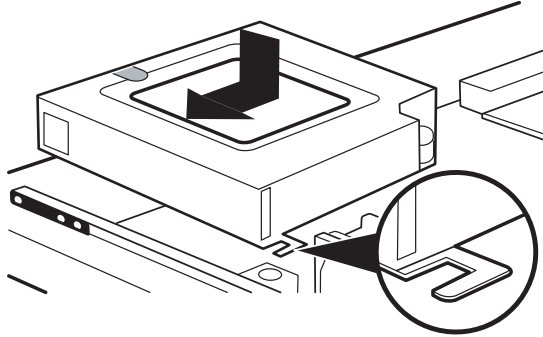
Installing the DVD Assembly Into the Chassis
